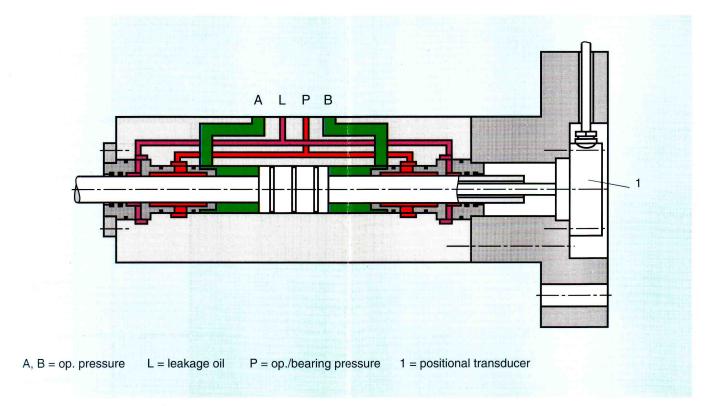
Schematic diagram of servo cylinder with full hydrostatic bearings (cavity bearings) supporting the piston rod
